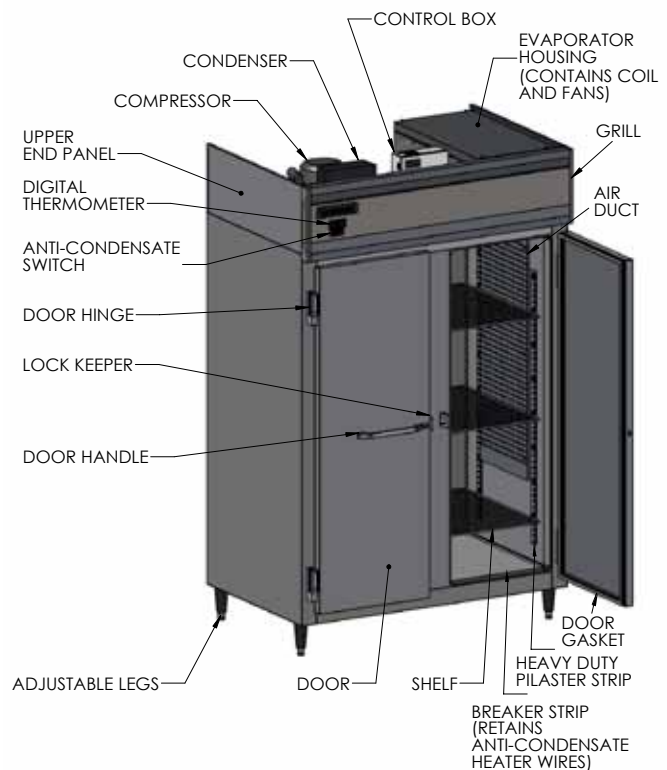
B: Roll-In or Roll-Thru Refrigerator or Freezer
